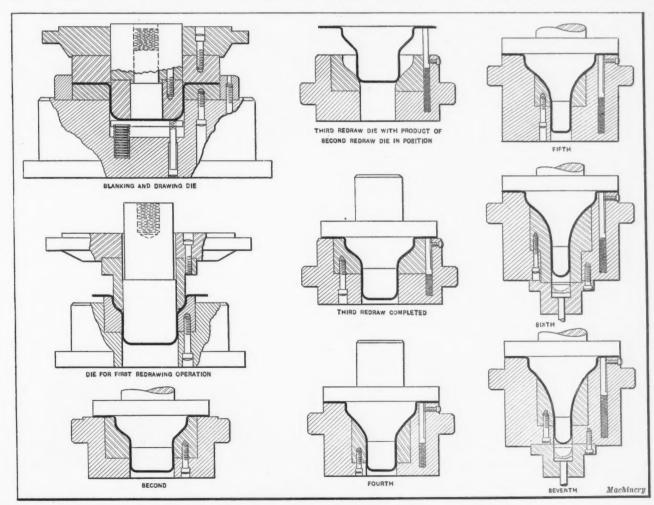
Drawing Dies employed in the Production of the Fan Stand Base
